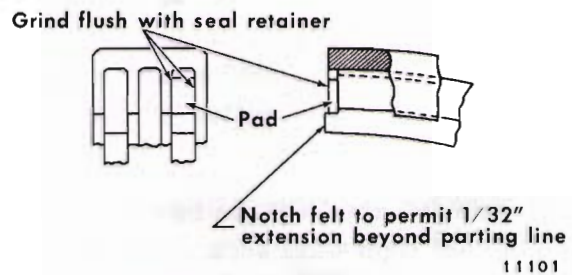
Motor Side - Axle Bore Seal Retainers
